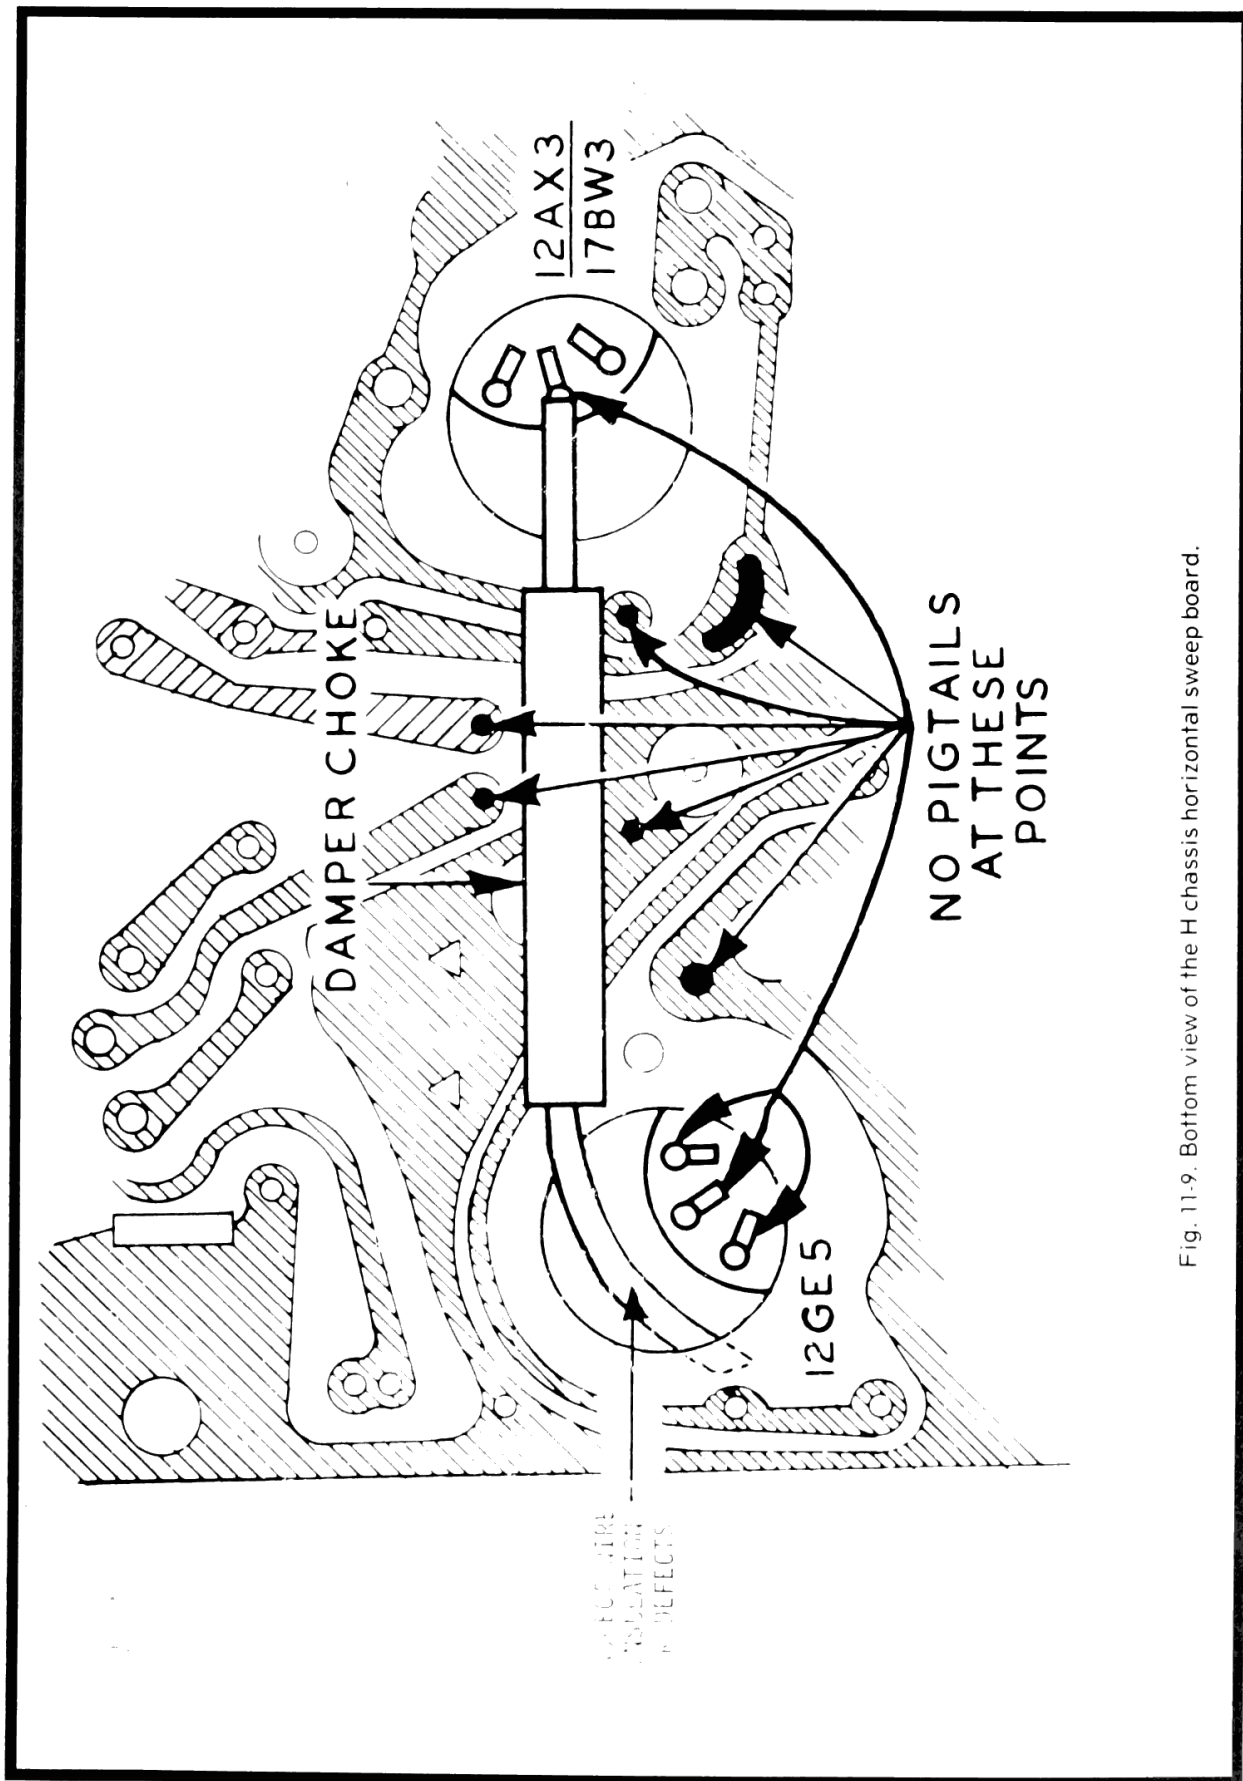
Bottom view of the H chassis horizontal sweep board.
